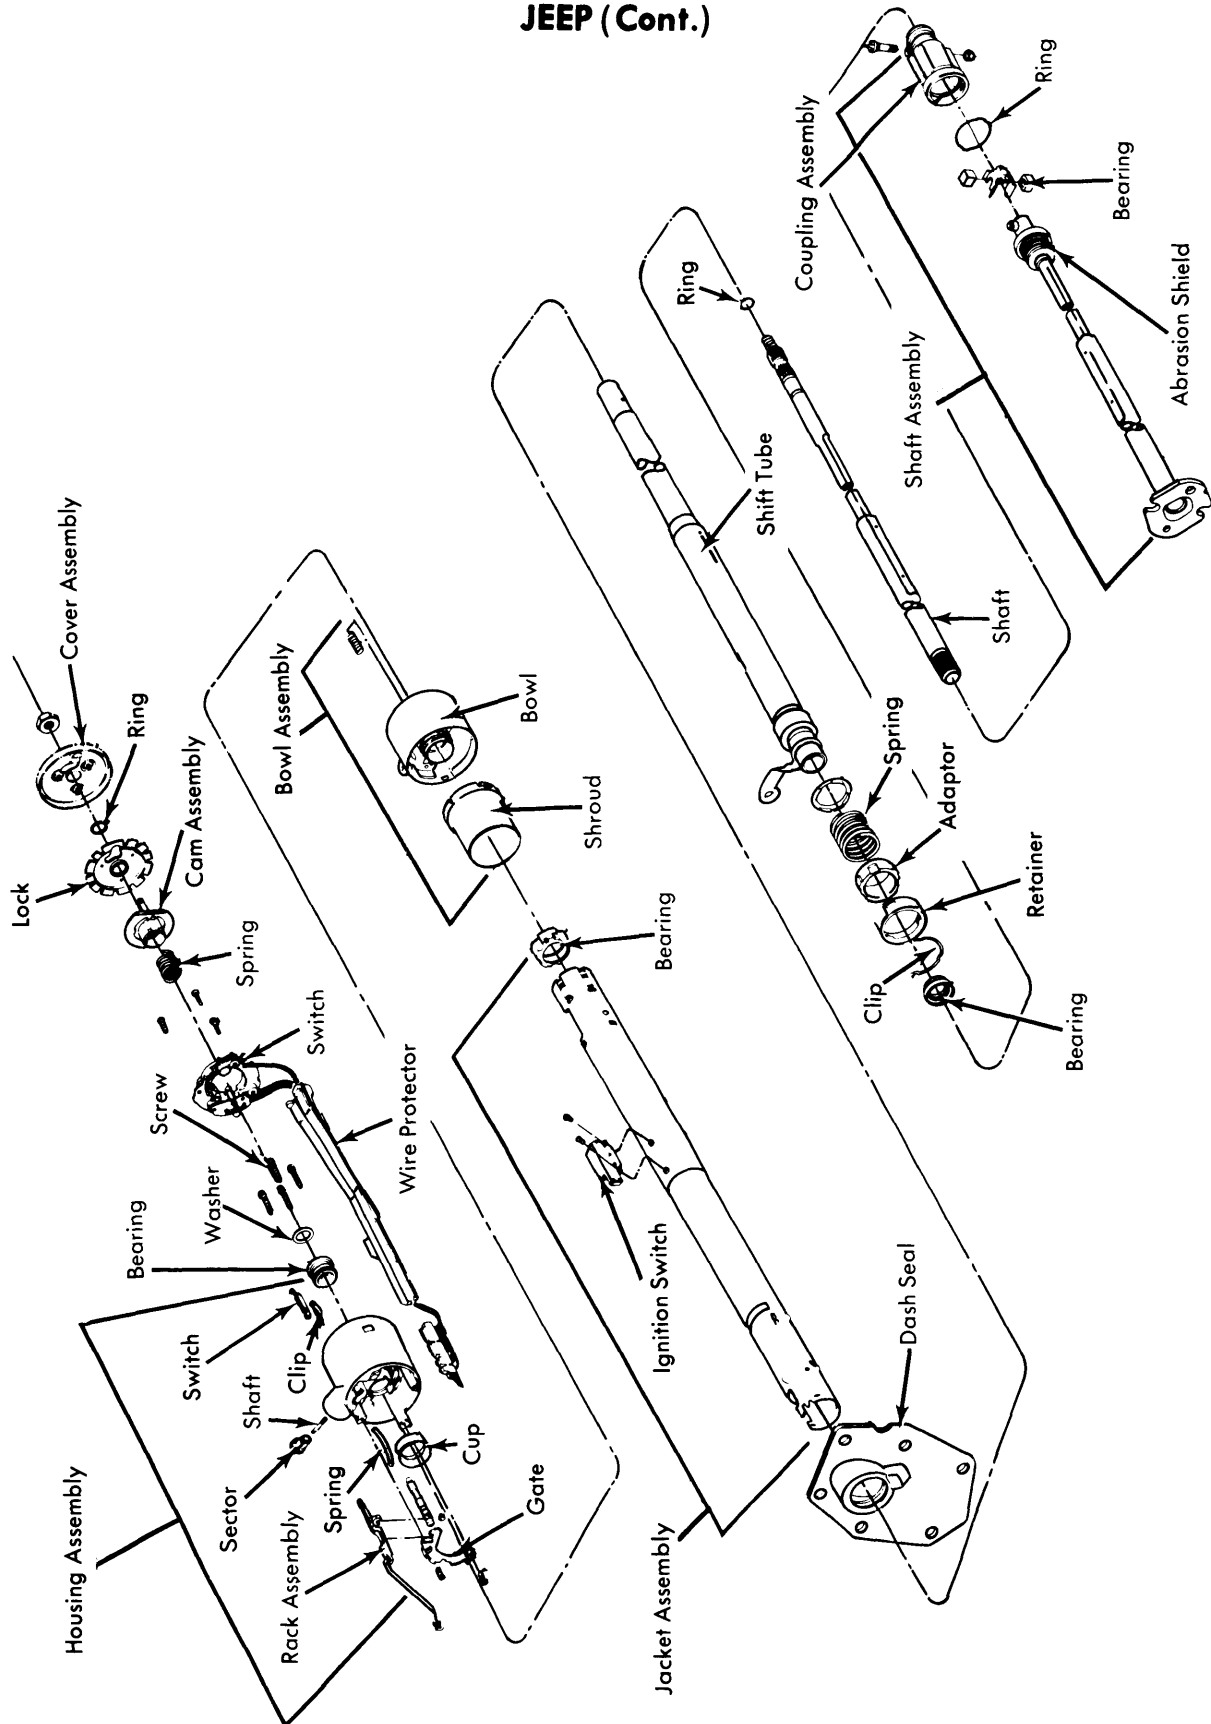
Disassembled View of Non-Tilt Steering Column Assembly (Automatic Transmission Model Shown)
